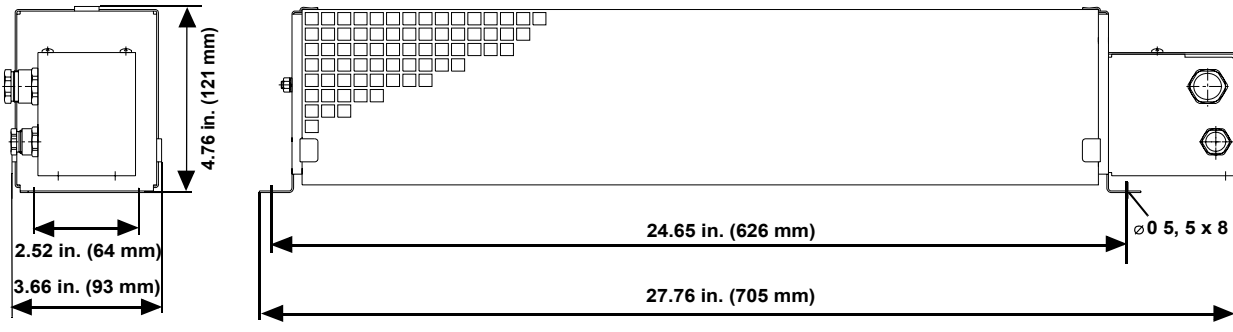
Mounting Dimensions for 230V External Shunt (P/N M.1015.7046)
